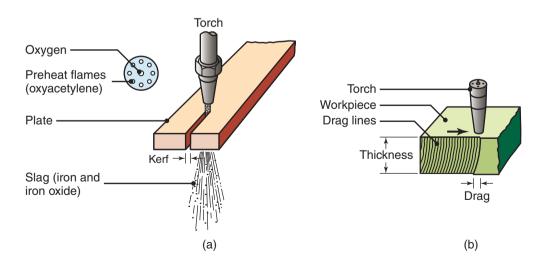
(a) Flame cutting of a steel plate with an oxyacetylene torch, and a cross-section of the torch nozzle. (b) Cross-section of a flame-cut plate, showing drag lines.
